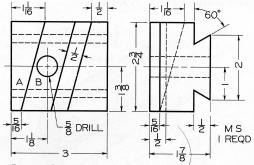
Dovetail Slide. Draw complete given views and auxiliary views, including view showing true size of surface 1–2–3–4 (Layout B–4).
